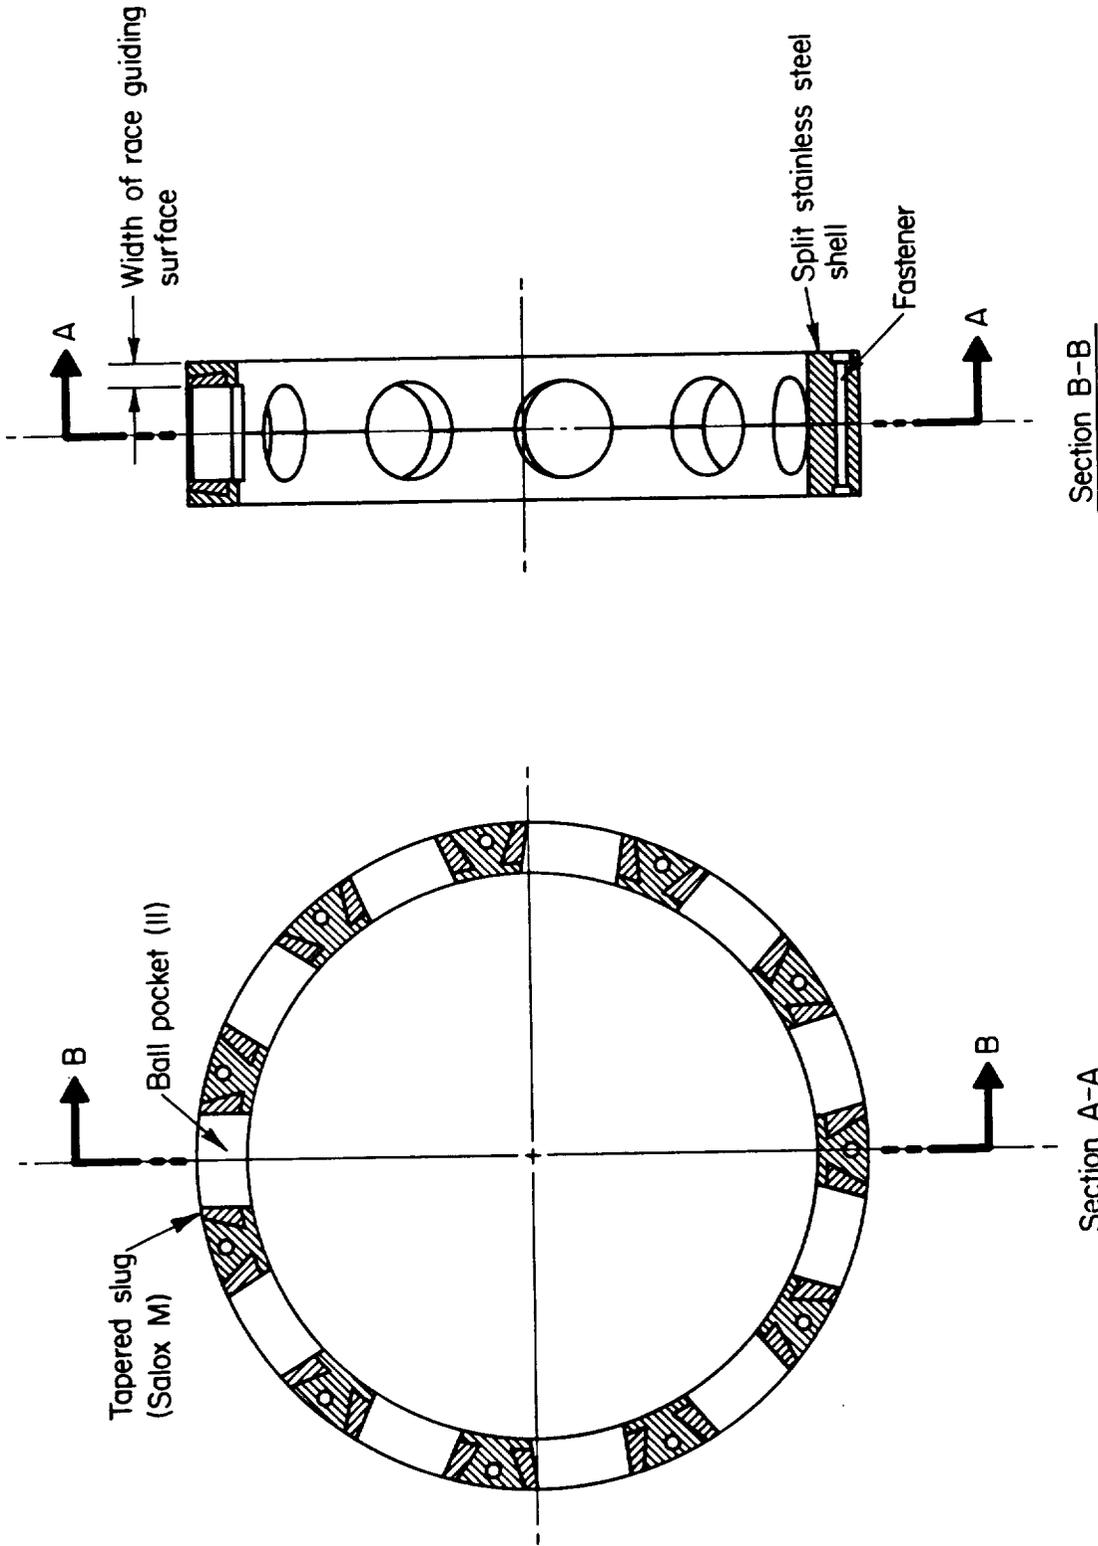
POSSIBLE CAGE CONFIGURATION USING SALOX M BALL POCKET INSERTS
